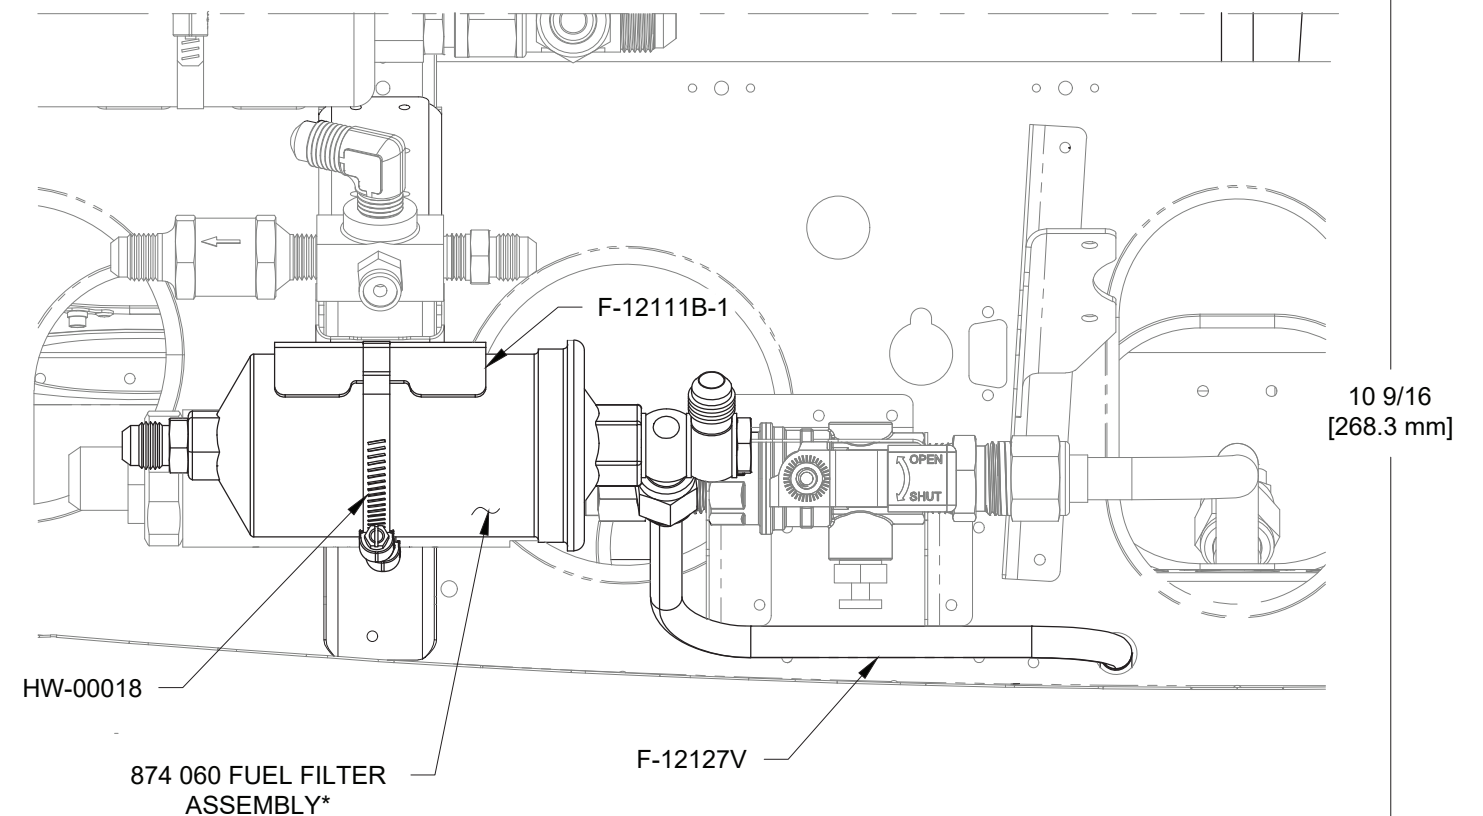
874 060 FUEL FILTER ASSEMBLY* INSTALLATION
